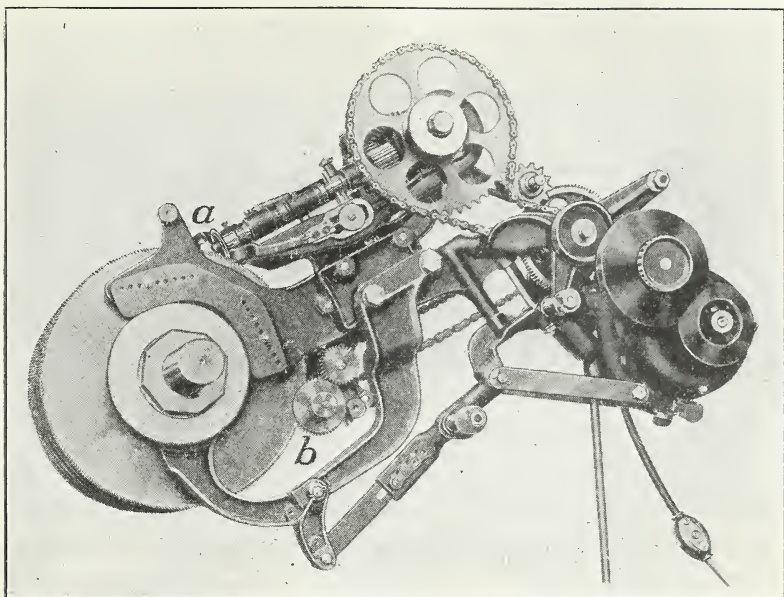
A portable duplex, motor-driven filing-gumming machine having both rotary gummers, *a*, and rotary side files, *b*; also made for using angular side files.
